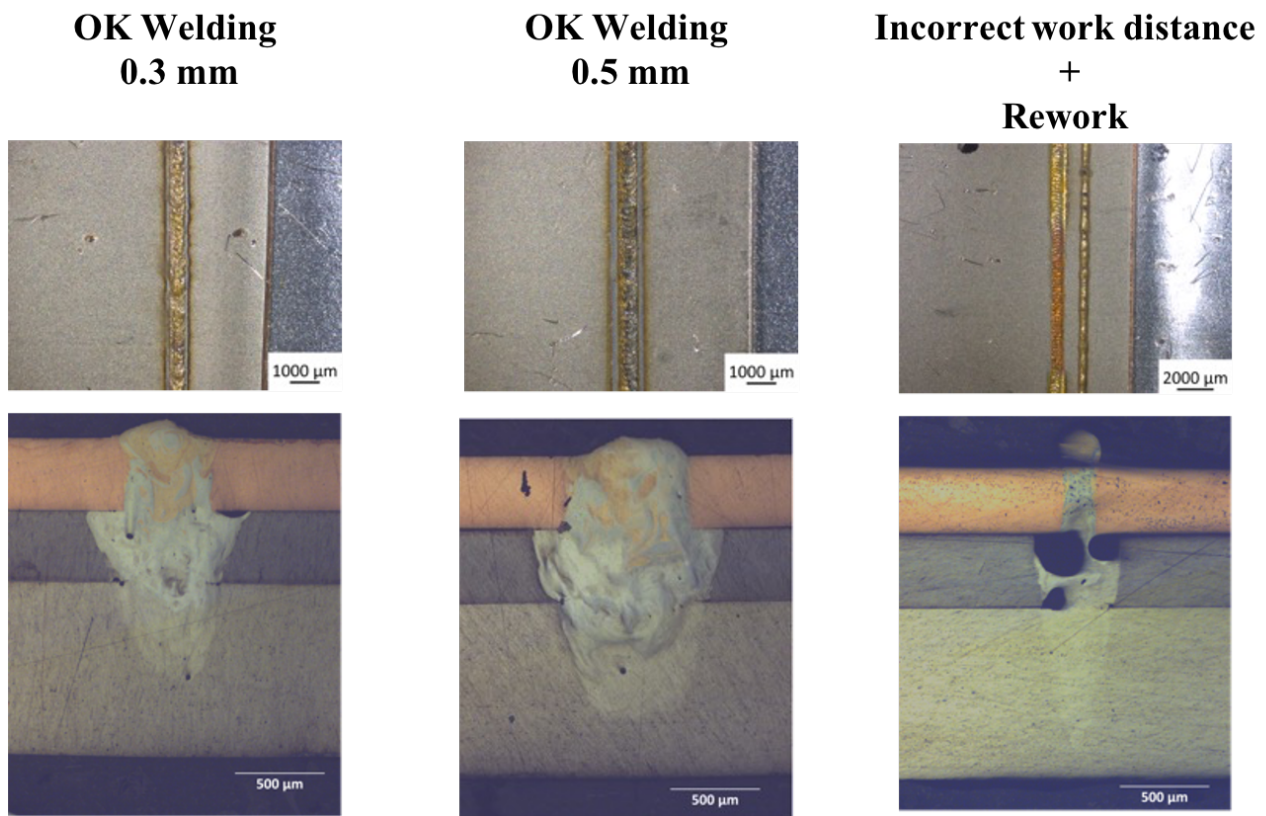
Top and cross section images of welded sample of Cu-Al-Busbar configuration after aging test.
